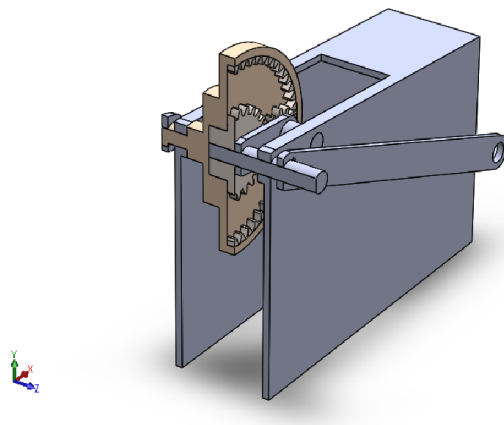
Synthesized Central Driving Arrangement of Components. Numbers Indicate, 2: Link-1, 3: Link-2, 10: Gear Pin, 11: Spur Gear-1, 12: Spur Gear-2, and, 15: Hub of Internal Gear. Note that the Static Ground Support is removed to Show the Internal Components
